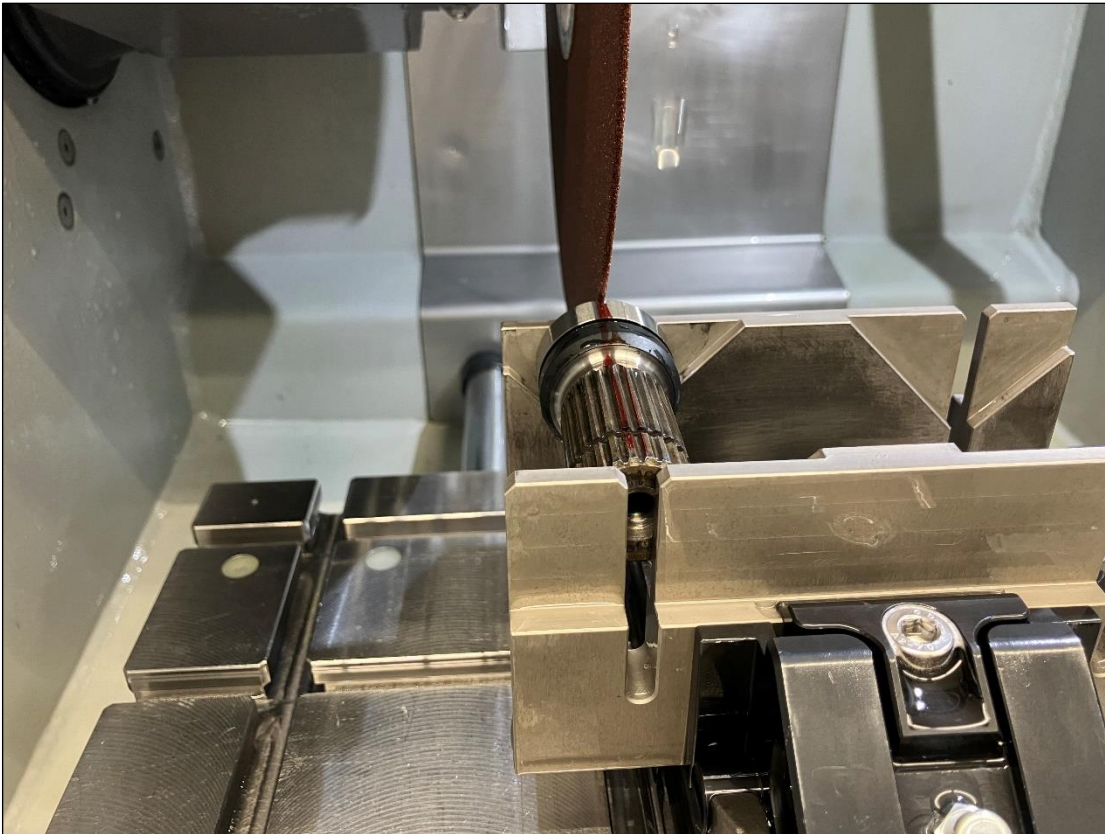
Cutting position 4 – BEFORE cutting process (Qtool 80 with 2x round bar jaw).
